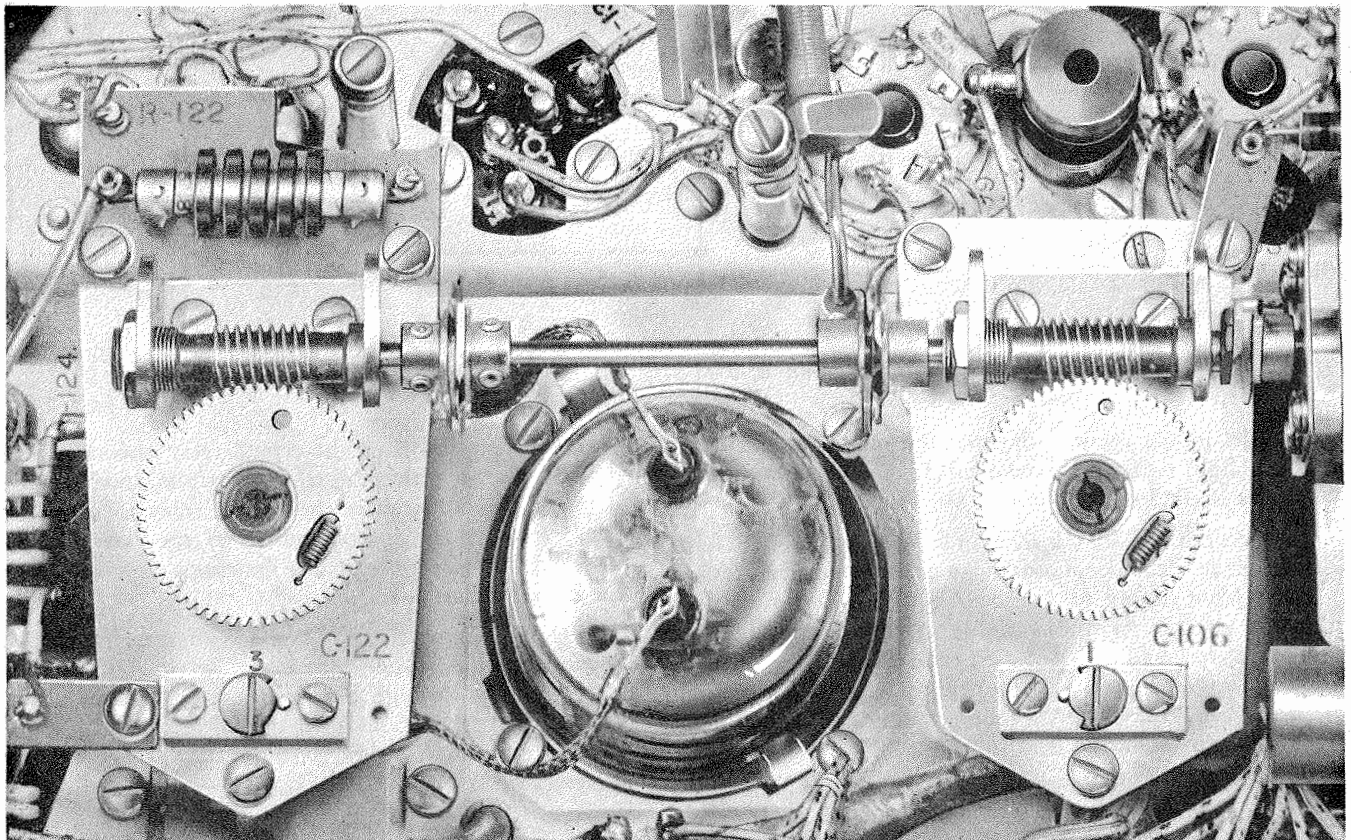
Radio Transmitter T-67/ARC-3 or T-312/ARC-36 Without Modification M-3—Drive Shaft and Variable Capacitor Gears
